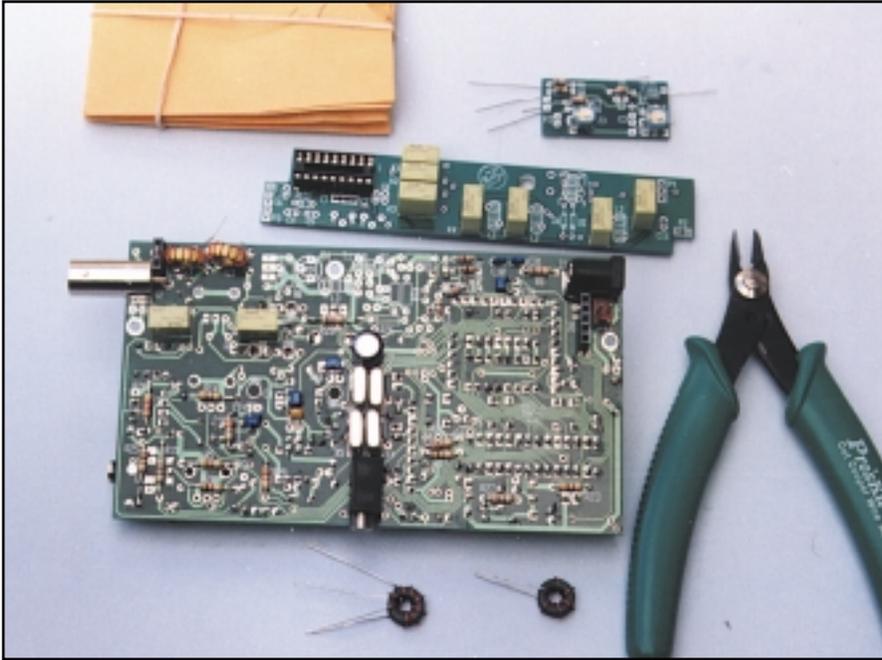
Assembly begins as various parts, switches, and LED display begin filling holes on the main PC board. The keys to building a kit rig such as the KX1 are a steady hand, small soldering iron, thin solder, patience, and a good magnifying visor (I use an inexpensive one from "Nancy's Notions," 1-800-833-0690).
